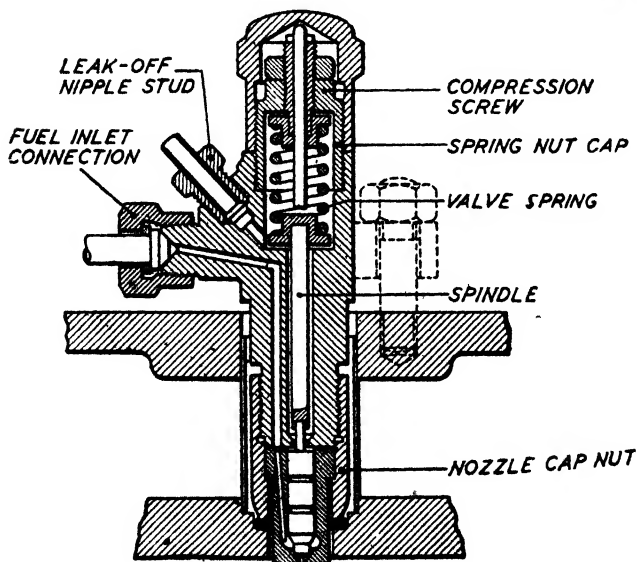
SECTION OF C.A.V. NOZZLE HOLDER, TYPE BKB
